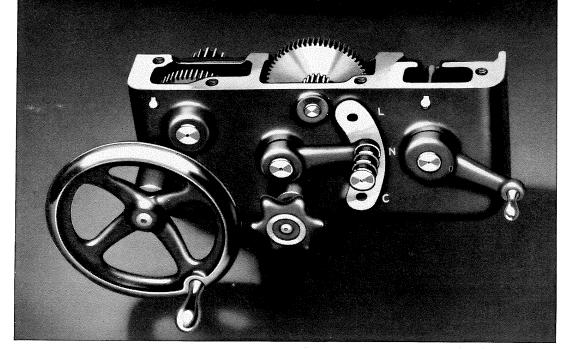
Front View of Series "T" Double Wall Apron Showing Rigid Box Type Construction
